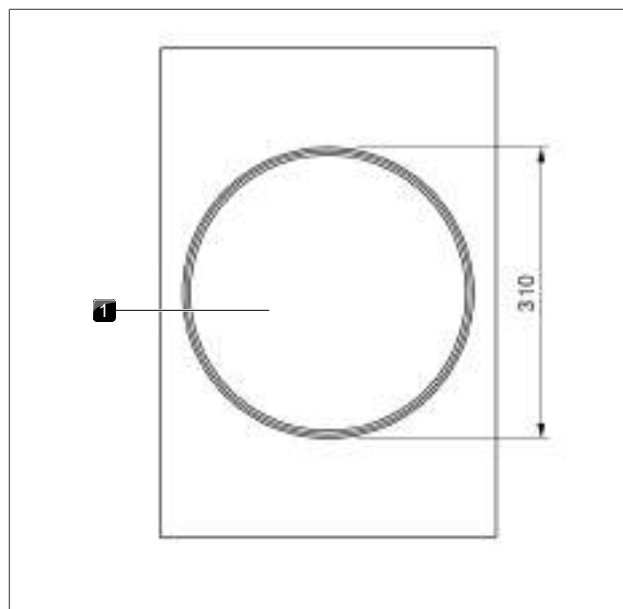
Layout of cooktop PKIW3 and cooking zone dimensions
